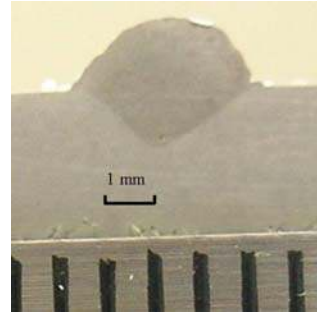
, Weld bead and cross section view of DB-GMAW (Bypass current L&R : 30A-30A)
